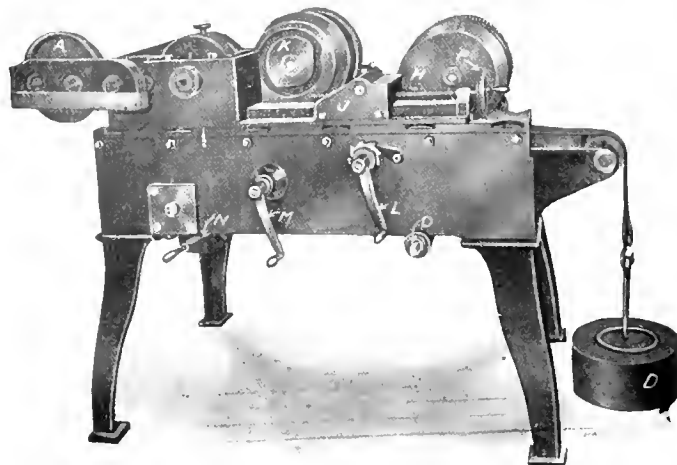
The Rowbottom Universal Cam Cutting Machine
